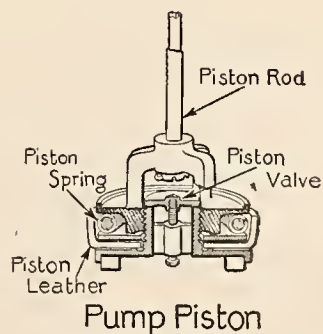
Section of piston, showing cup-leather, expander-spring, and lift valve
